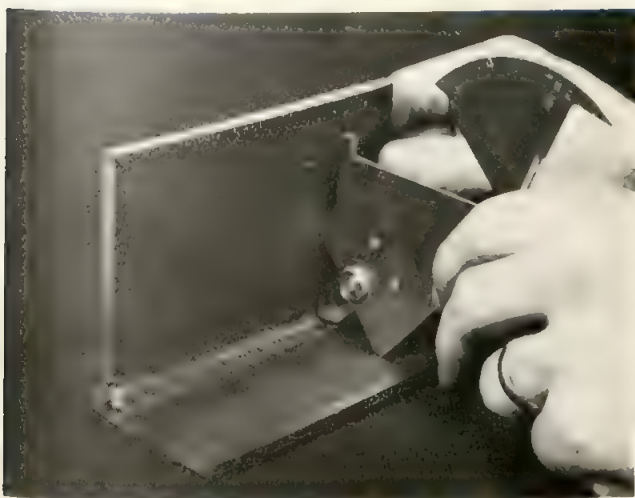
Fillet weld size and method of checking.
